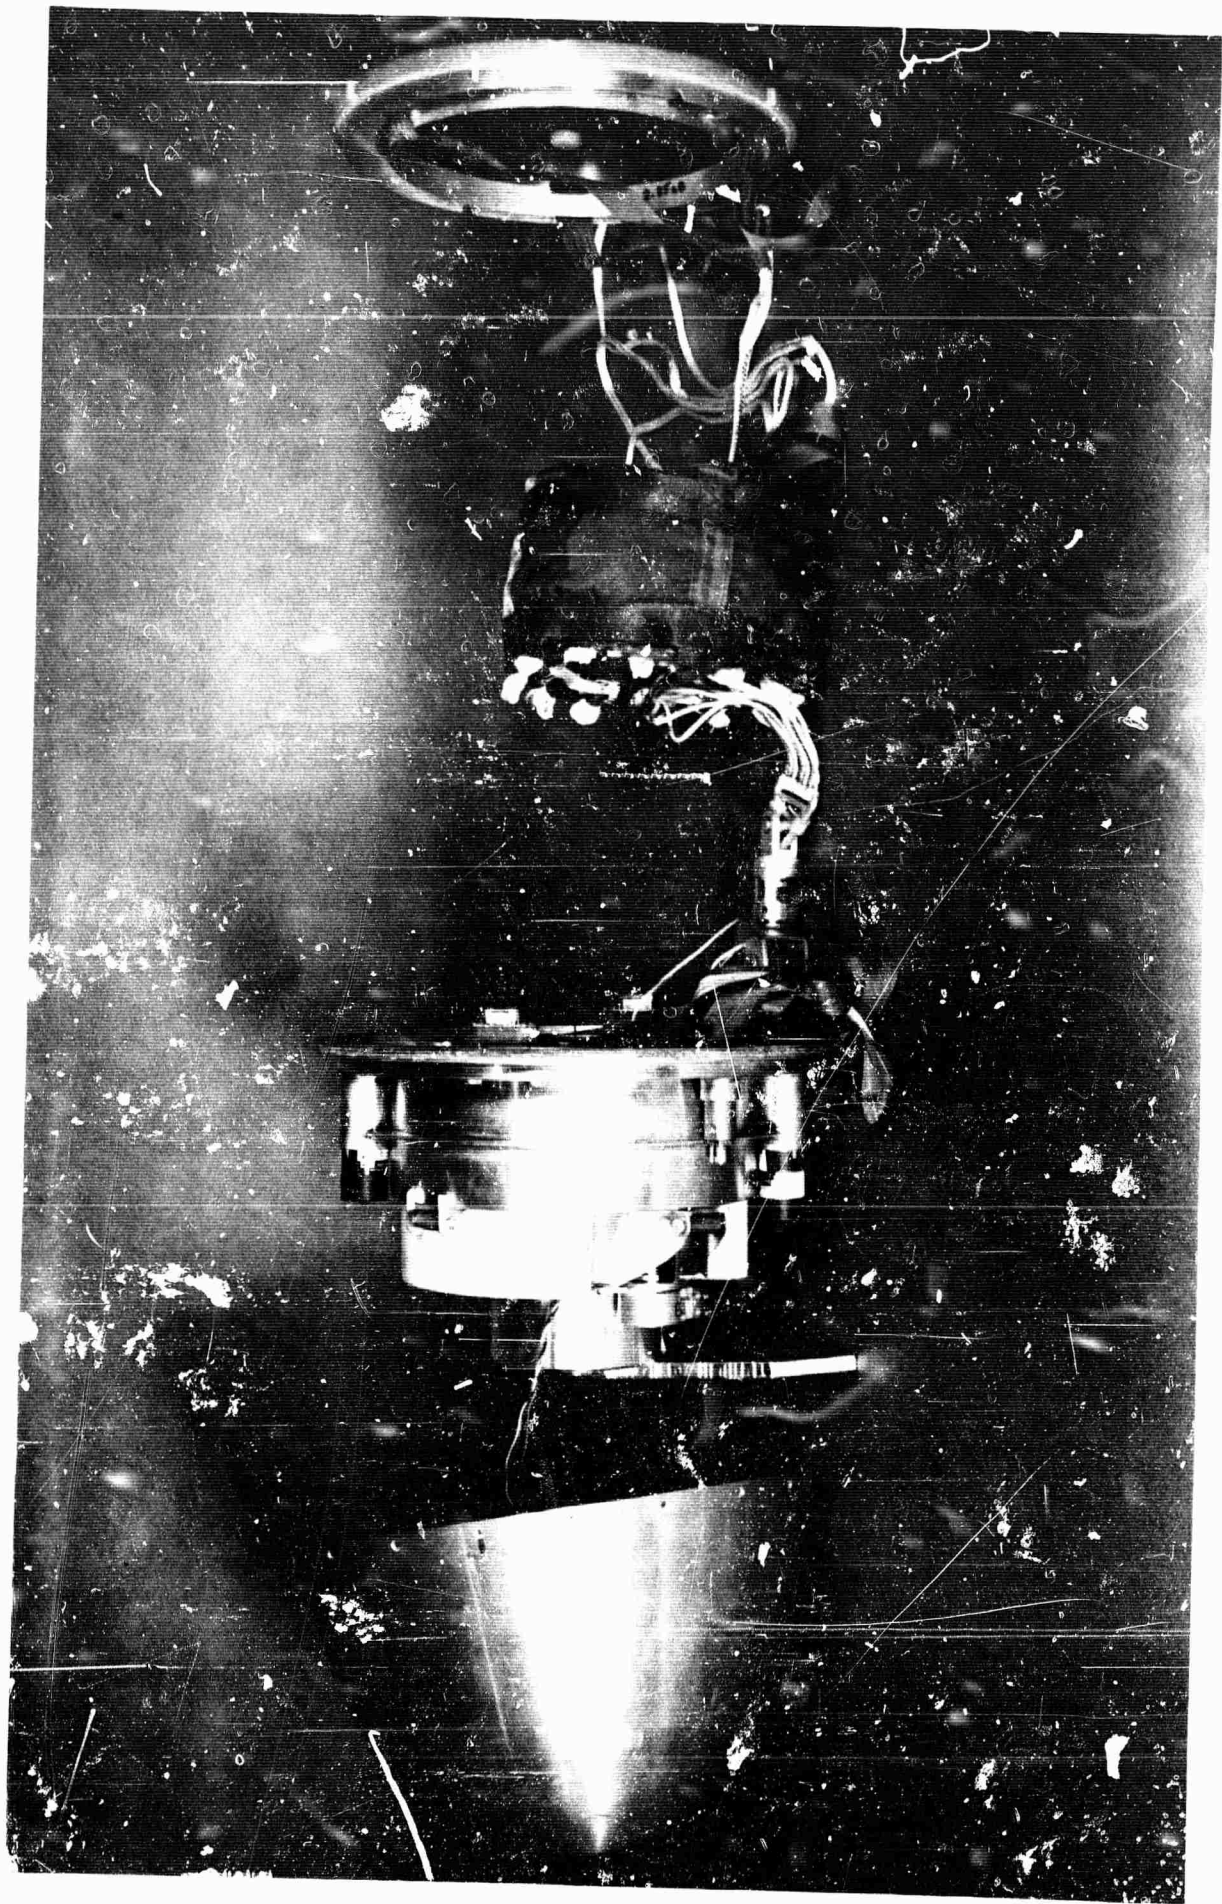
AMRAD Target Project, Experiment I, Recorder Recovery Body, Exploded View
